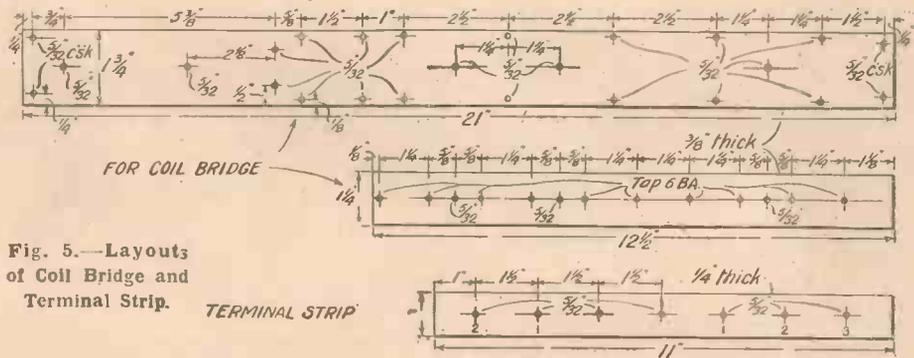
Layouts of Coil Bridge and Terminal Strip.
